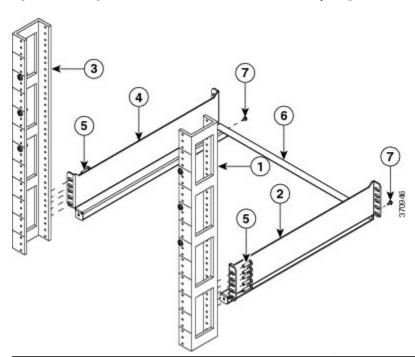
Installing Shelf and Crossbar Brackets in a 17.5-inch Opening
